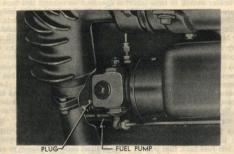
Air Bleed Plug on Power Unit Fuel Pump
